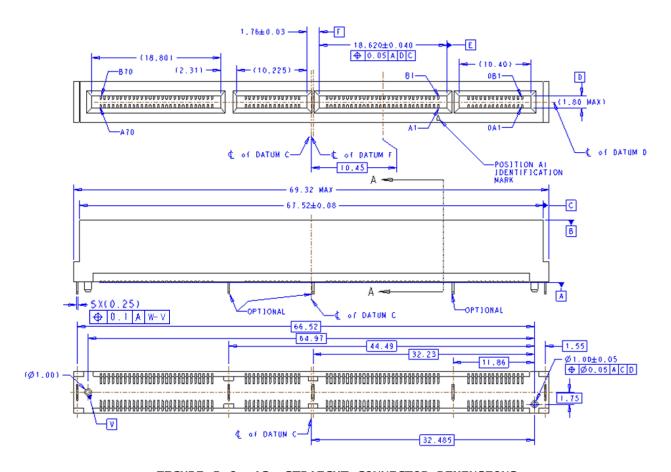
4C+ STRAIGHT CONNECTOR DIMENSIONS
